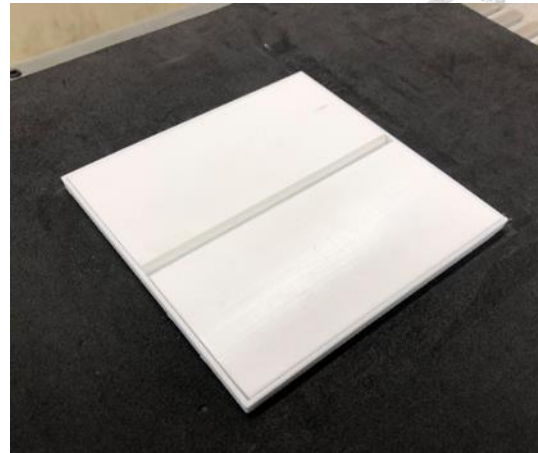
(a) shows a translucent text screen augmented in the real scene with welding process parameters and required welding instructions displayed. A fixture is used to place the 3D printed plates (Fig. 2.11(b)). Next, a virtual welding joint is overlaid on the plates (Fig. 2.11(c)). Users can set the welding speed by dragging the travel speed slider UI using the handheld controller. A red dot starts moving with the specified speed to guide users to
